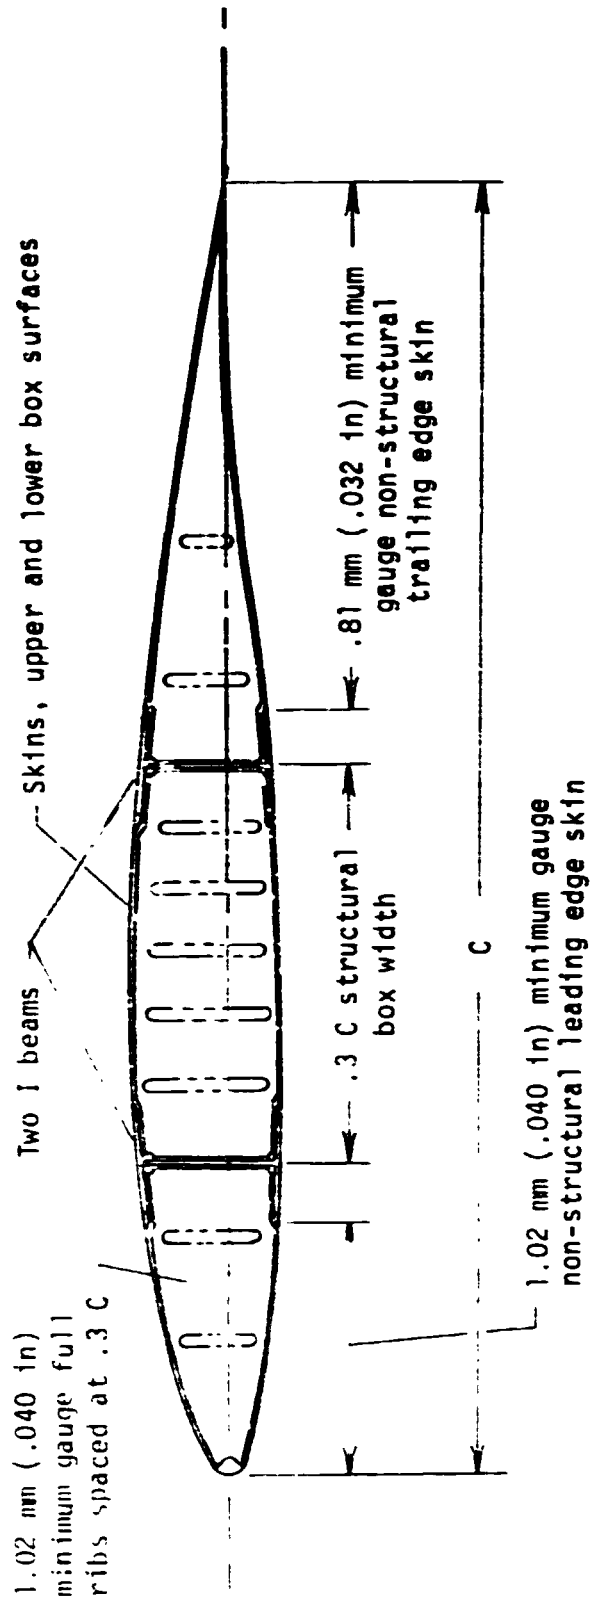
Typical wing strut two beam structural box and secondary structure.
